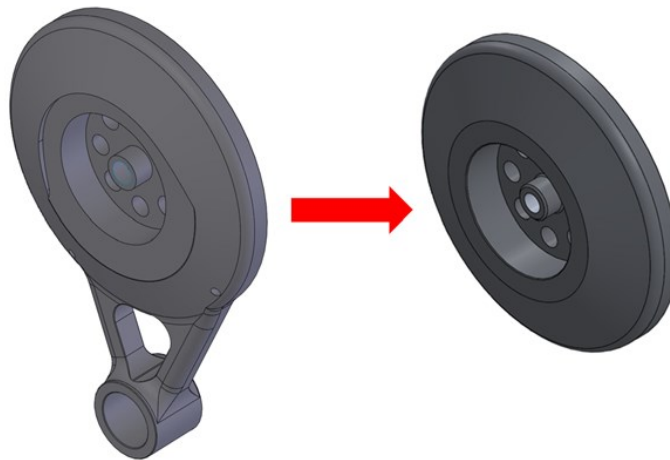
Lateral motor cap design (right). Modified from existing motor component (left)
